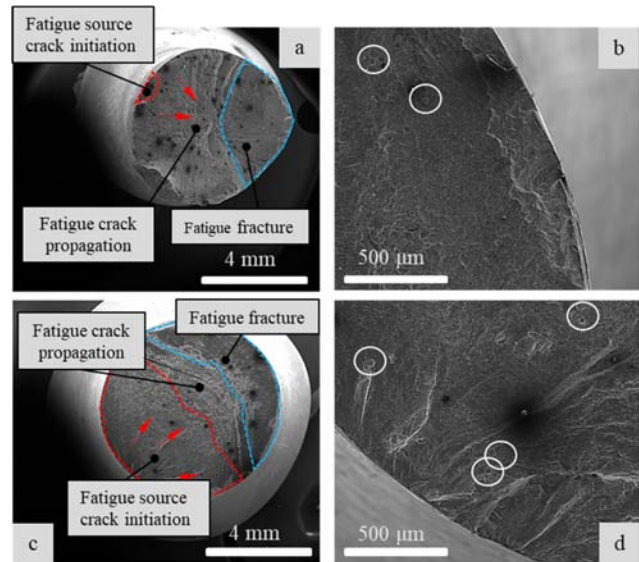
Fracture surface and detail of the fatigue crack initiation site of the *machined* / Z (a, b) and *machined* / X (c, d) samples after fatigue testing.
